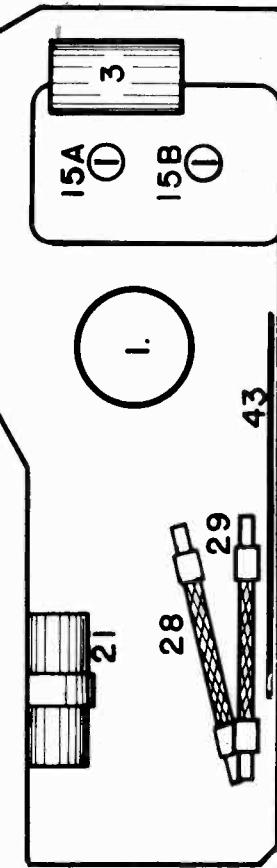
PARTS LAYOUT - - Vibrator filter
